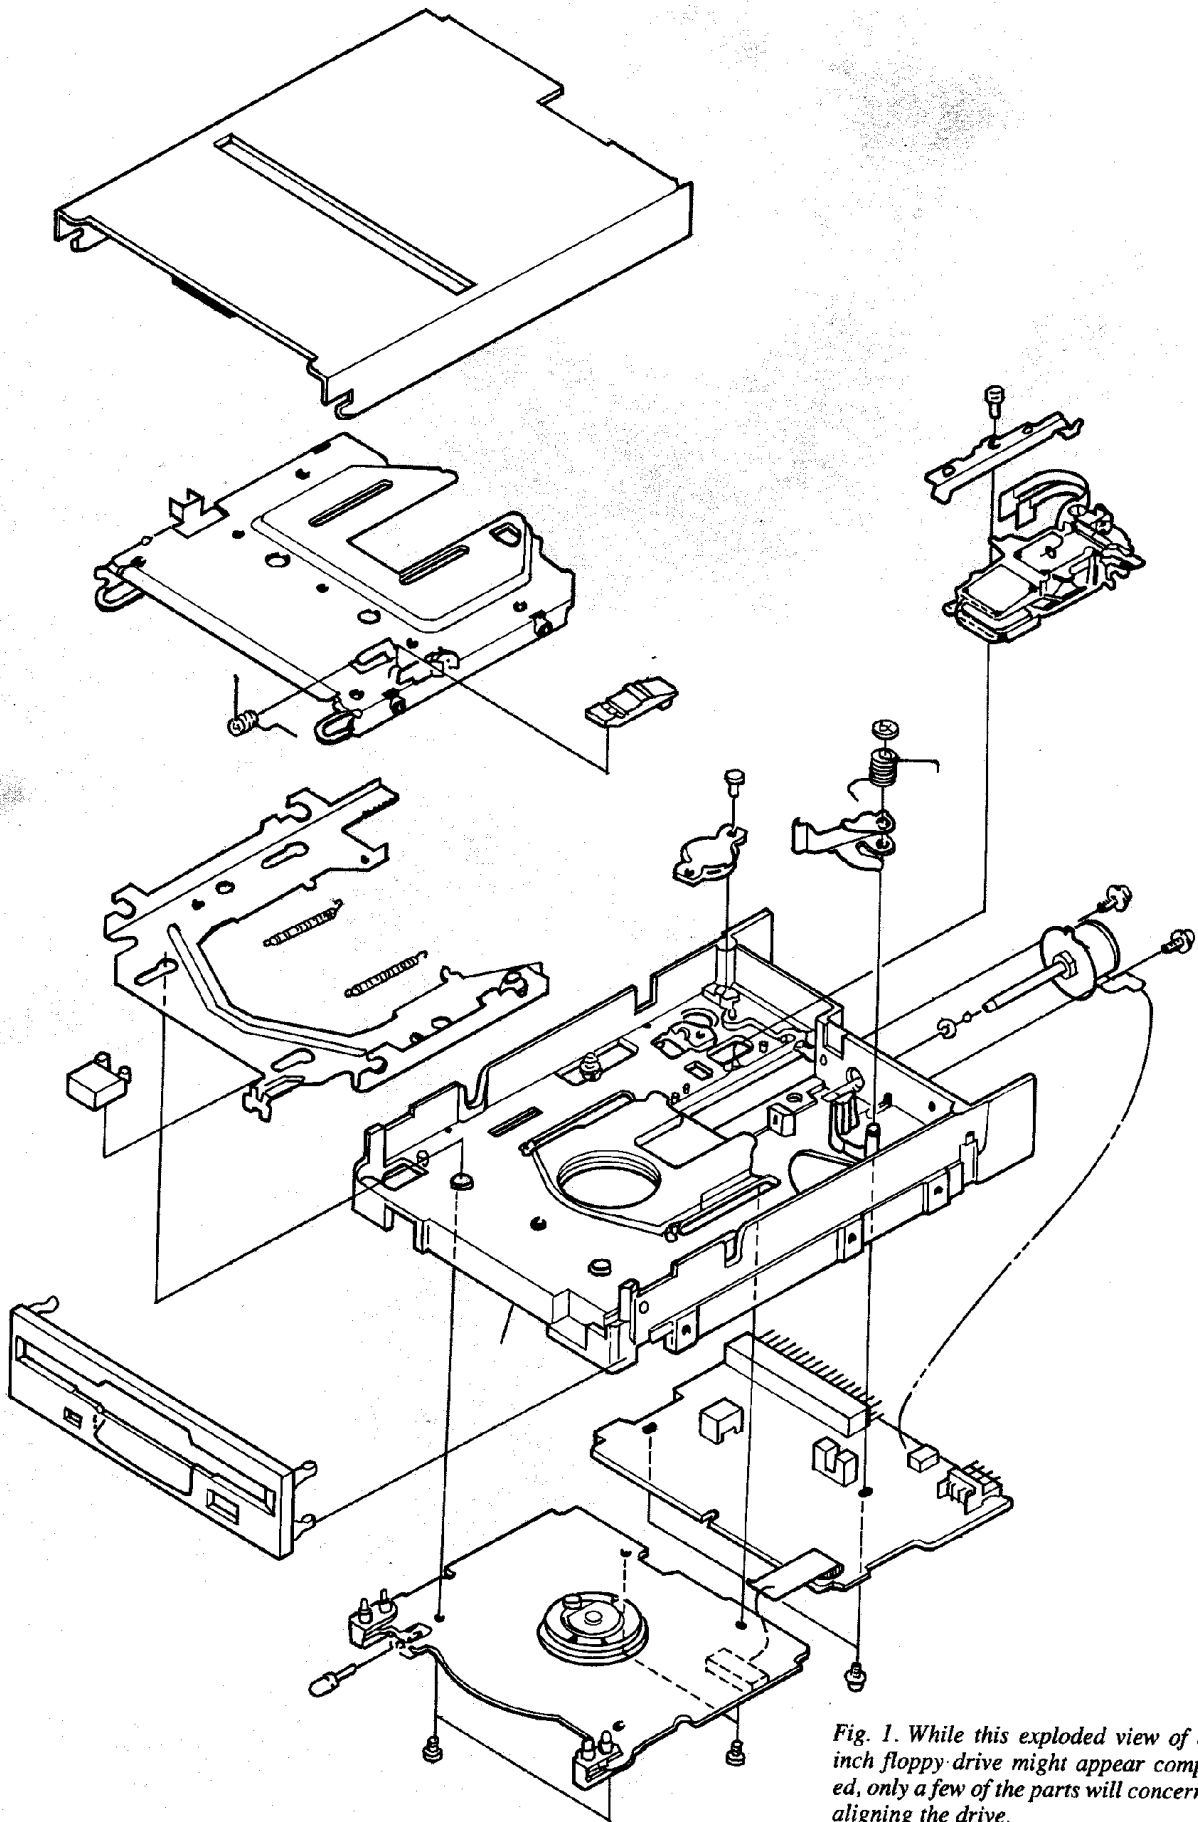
While this exploded view of a 3.5-inch floppy drive might appear complicated, only a few of the parts will concern us in aligning the drive.
